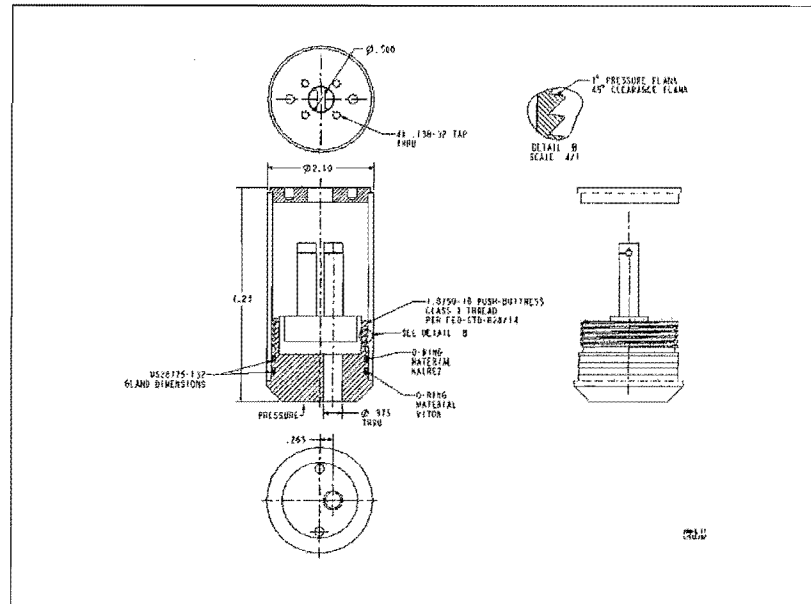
Cylindrical twin-column transducer designed for mechanical attachment of housing to base.
